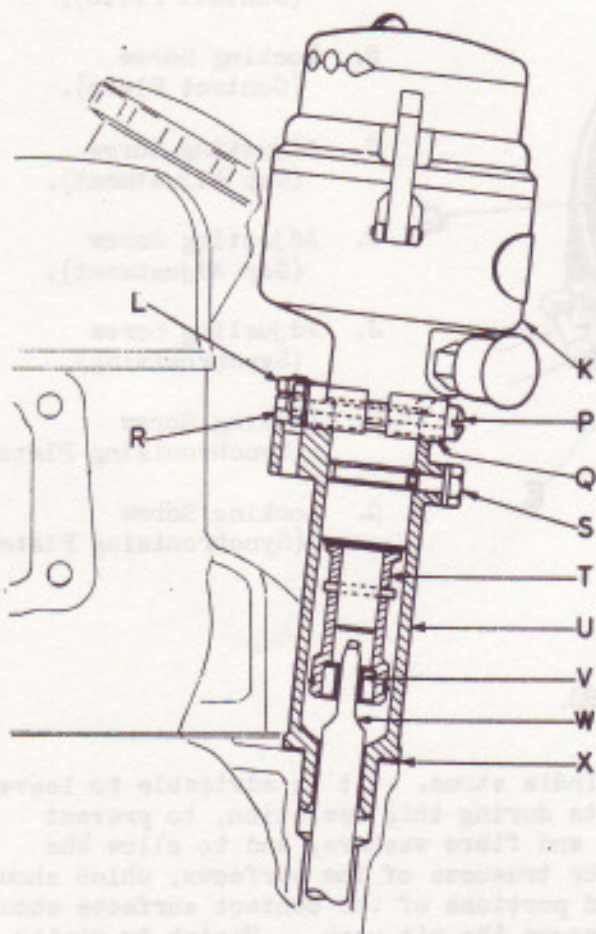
DISTRIBUTOR AND HOUSING IN POSITION.
